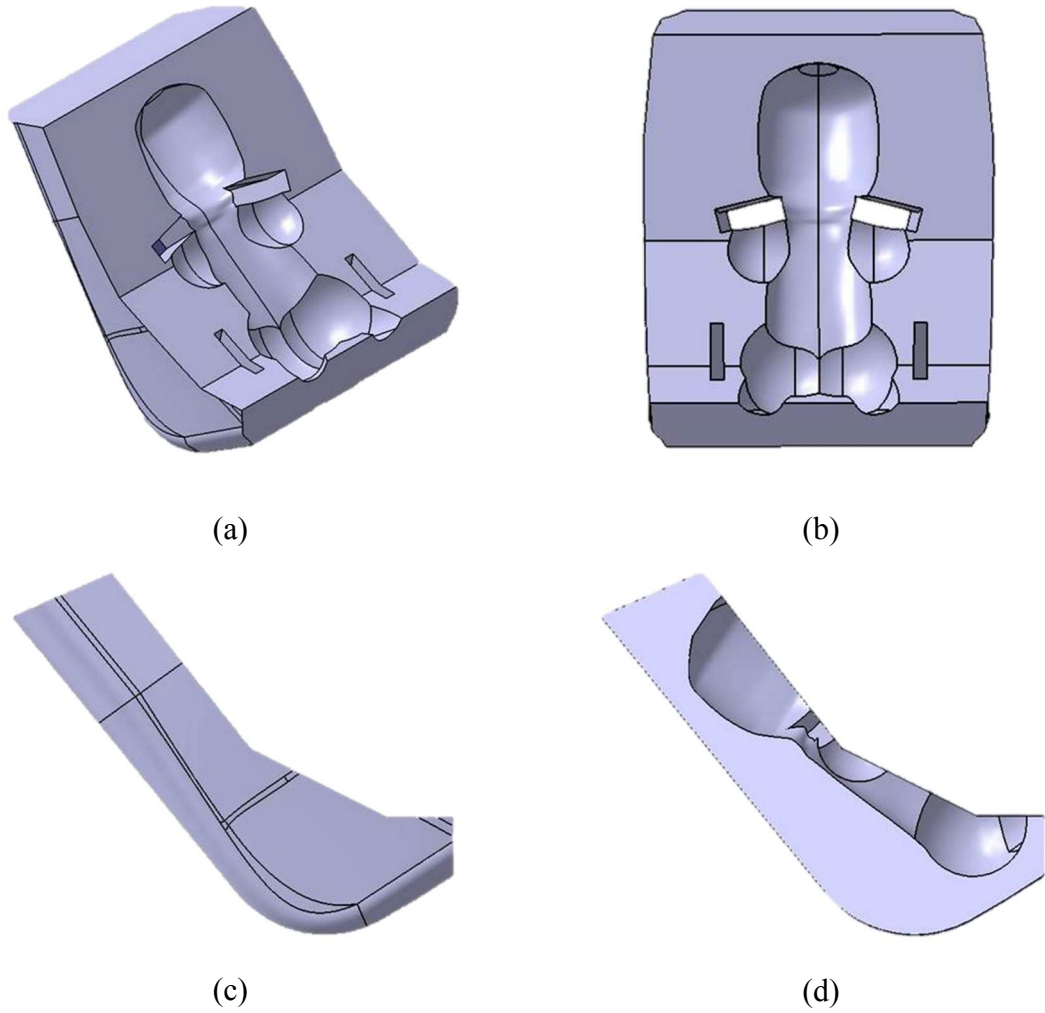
First physical PPD prototype (a) isometric view (b) angled view of the front (c) side view and (d) side section view.
